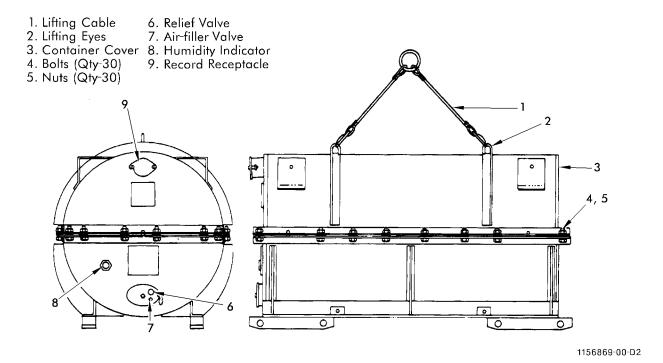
Shipping and Storage Container 8145CON004-1; Removal and Installation of Cover
